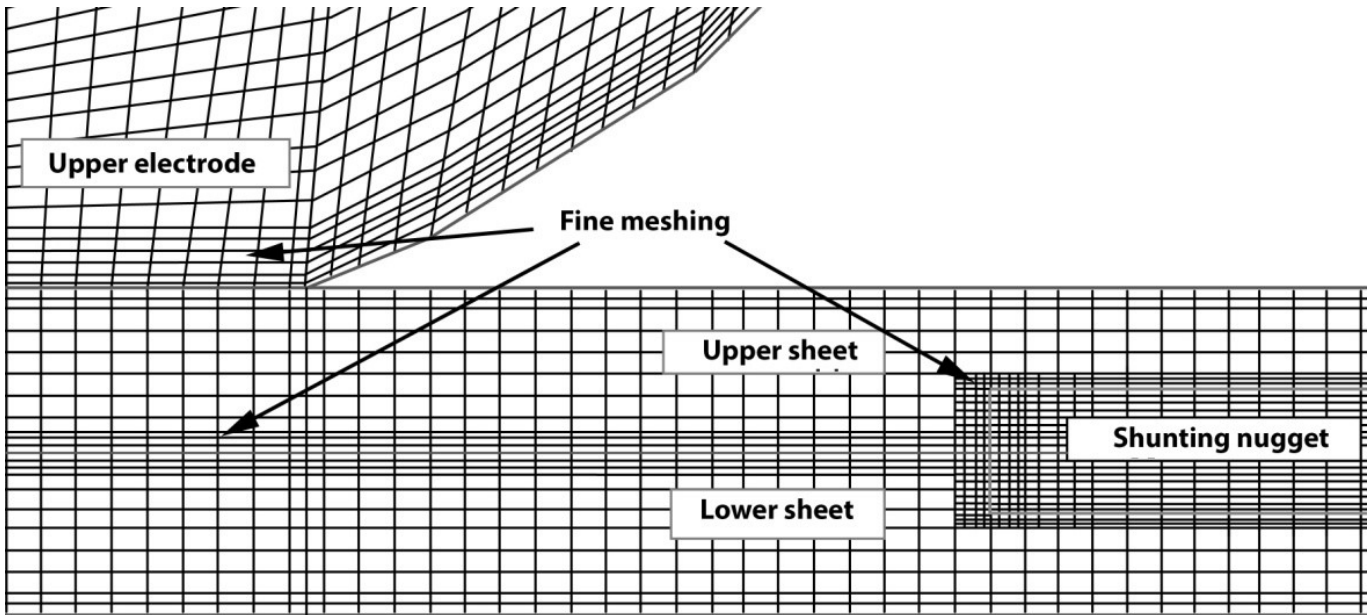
Meshing of electrodes, sheets, previous welding nugget
